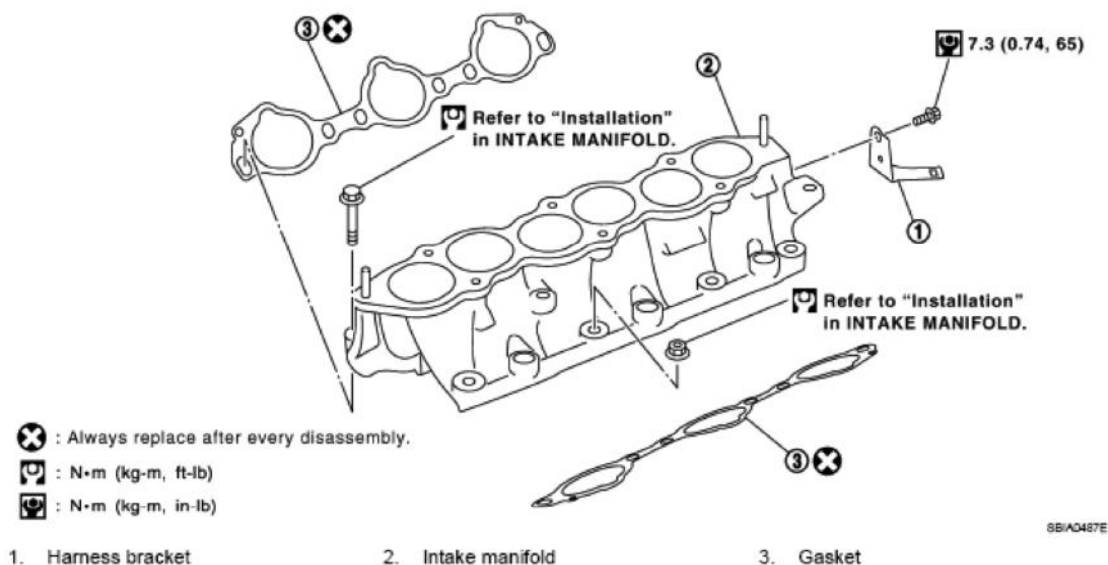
Identifying Intake Manifold Components With Torque Specification
